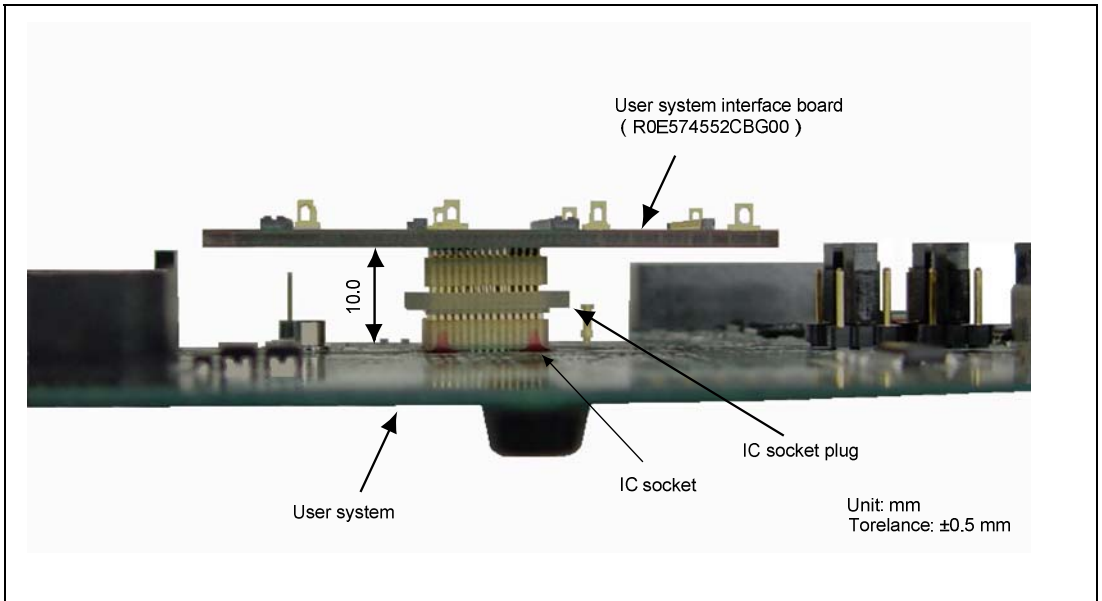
Dimensions after Connecting the User-System Interface Board (R0E574552CBG00)
